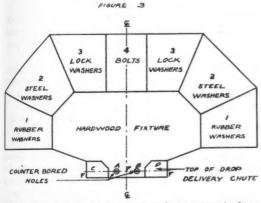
Plan drawing of improved work-arrangement, showing distribution of parts, locating holes for bolts in process, and delivery chute.
